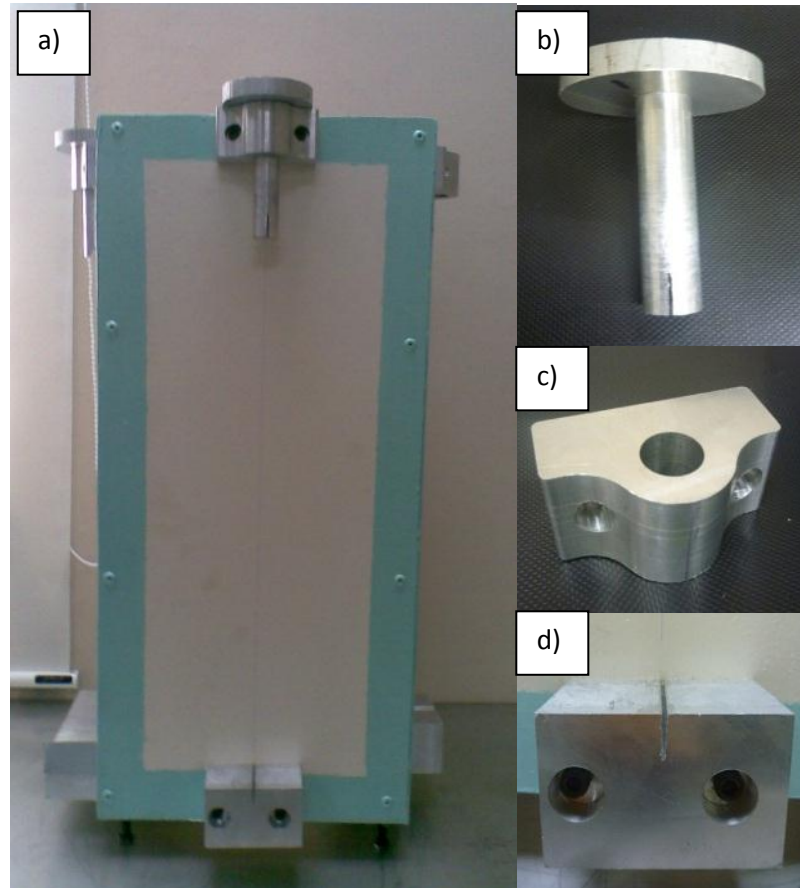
a) Buckling Test Rig, b) Load Holder and Top End Design, c) Upper Holder, d) Lower End Design.
